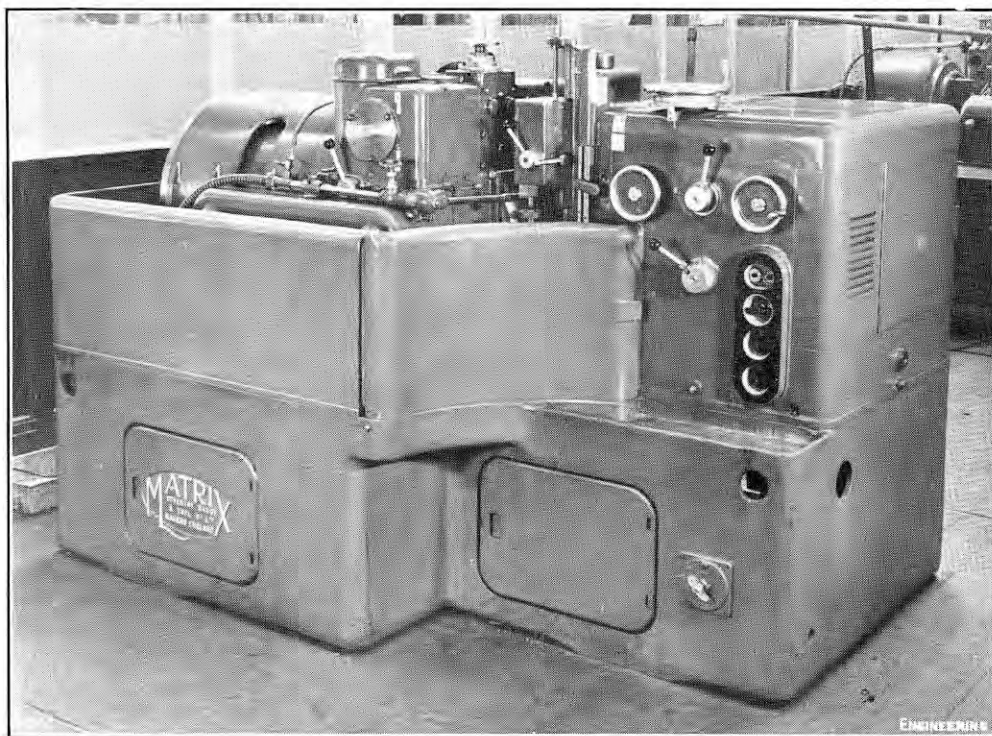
HIGH-SPEED GEAR GRINDING MACHINE; COVENTRY GAUGE & TOOL CO., LTD.
